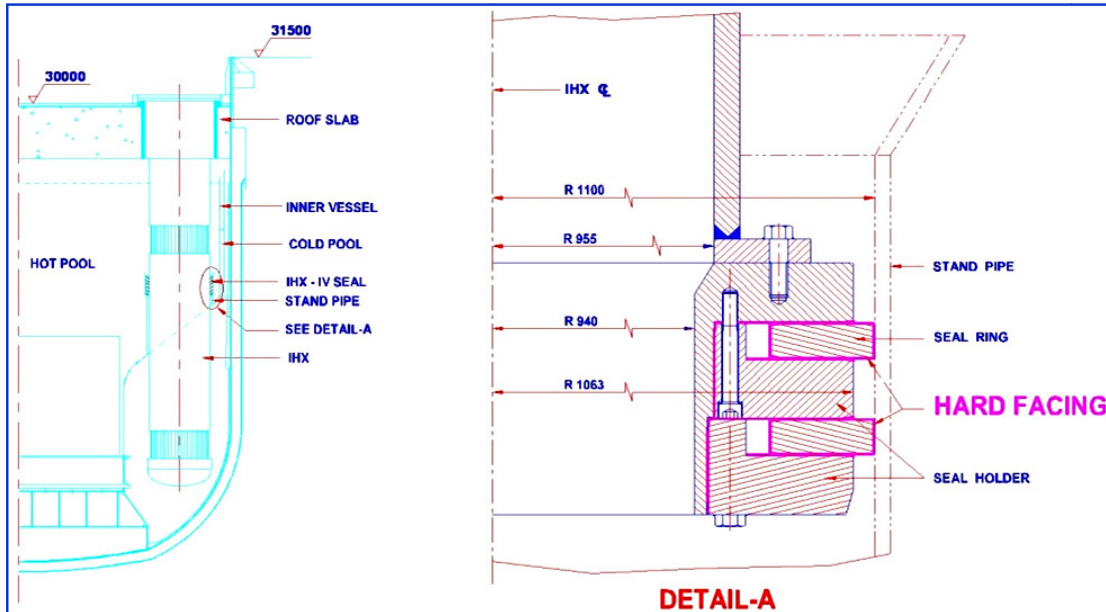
IHX Inner Vessel (IV) seal assembly arrangements
